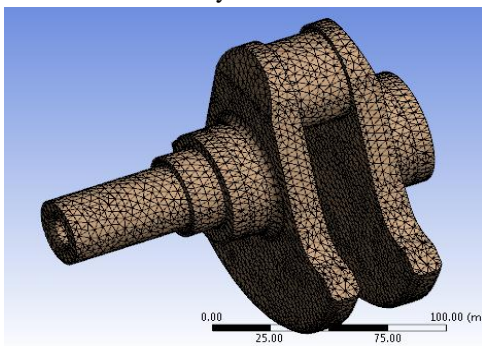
Meshing of single cylinder crankshaft with 2 mm element length size
